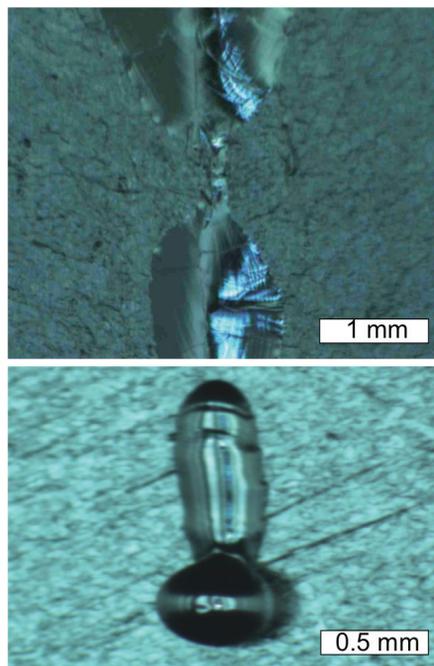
Incomplete welding seam (top) and welding spatter on the inner cavity surface.
